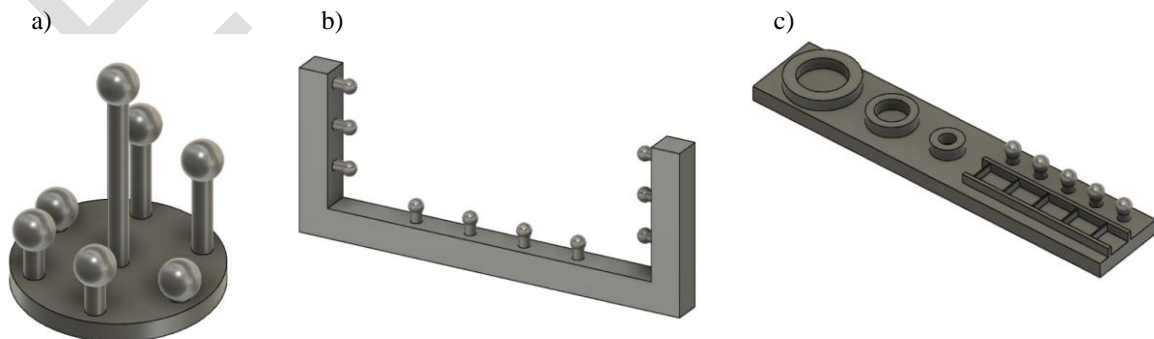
Projects: a) cylindrical ball plate; b) ball ruler; c) device of basic geometric forms.
